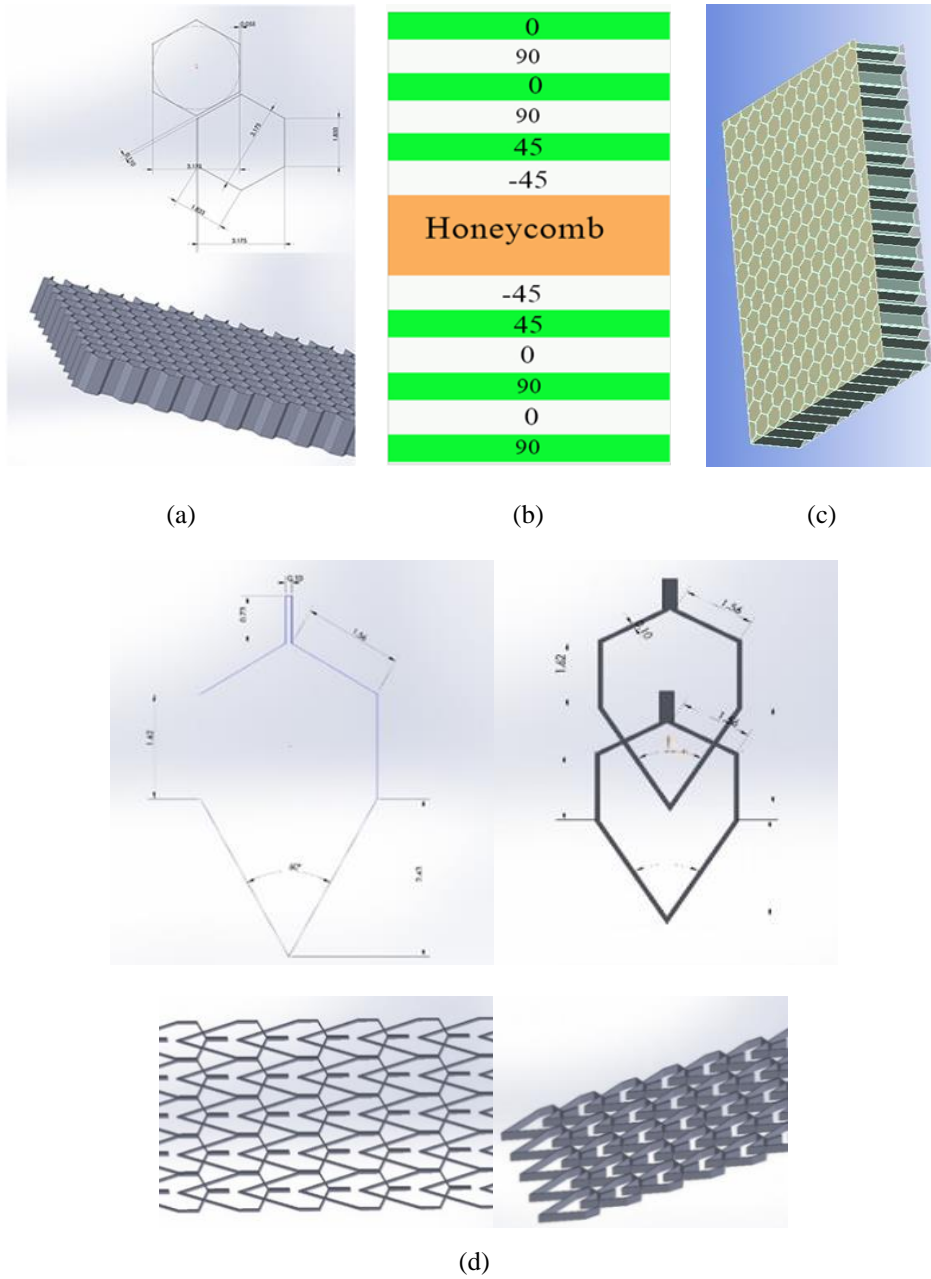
Schematic of honeycomb sandwich structure; (a) Hexagonal honeycomb; (b) Laminate layup composite; (c) Bounded surface of honeycomb core and face sheet; (d) Proposed core honeycomb inclined edge model
